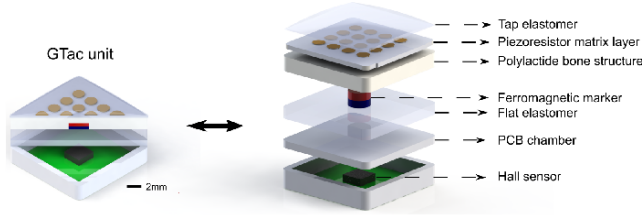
Exploded View of a GTac Sensor showcasing the multilayer structure and components, the GTac sensor combines the extrinsic piezoresistor sensor with the intrinsic magnetic sensor [62]
